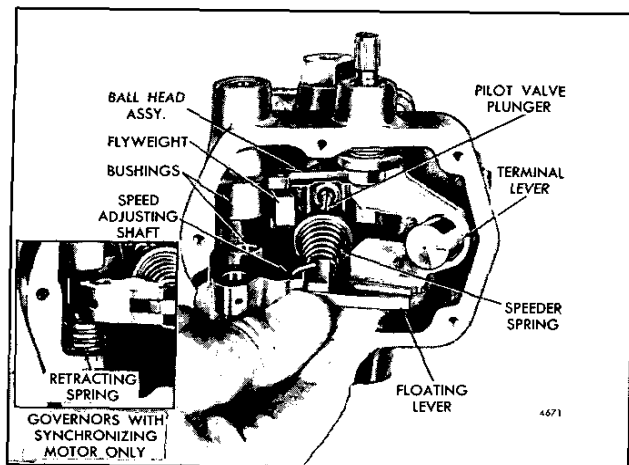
Installing Speed Adjusting Lever, Floating Lever, Speeder Spring and Pilot Valve Plunger Assembly
